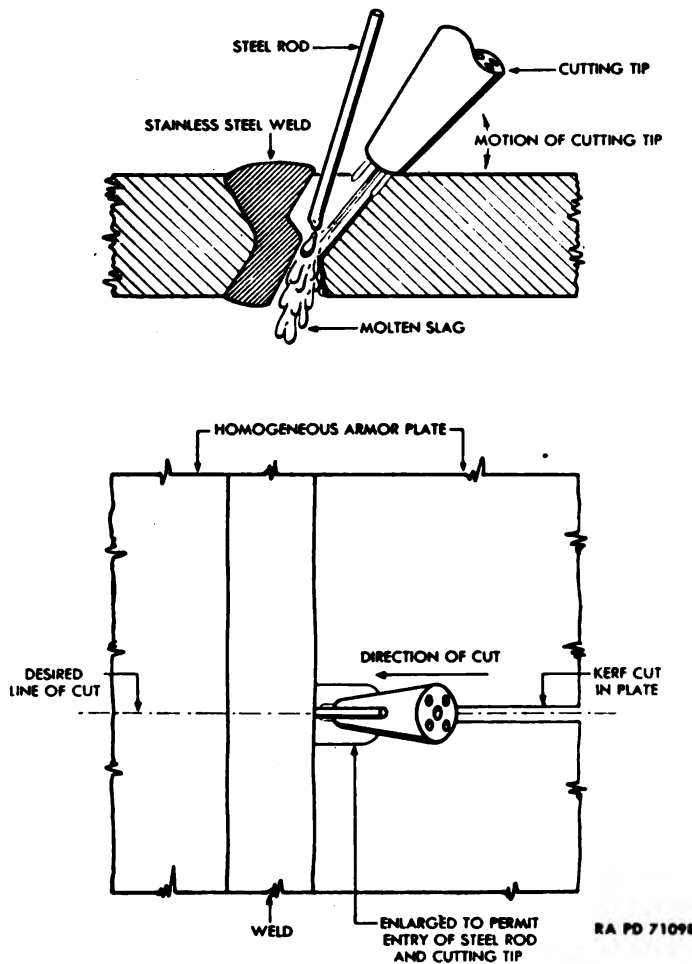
Method of Cutting Stainless Steel Welds.
